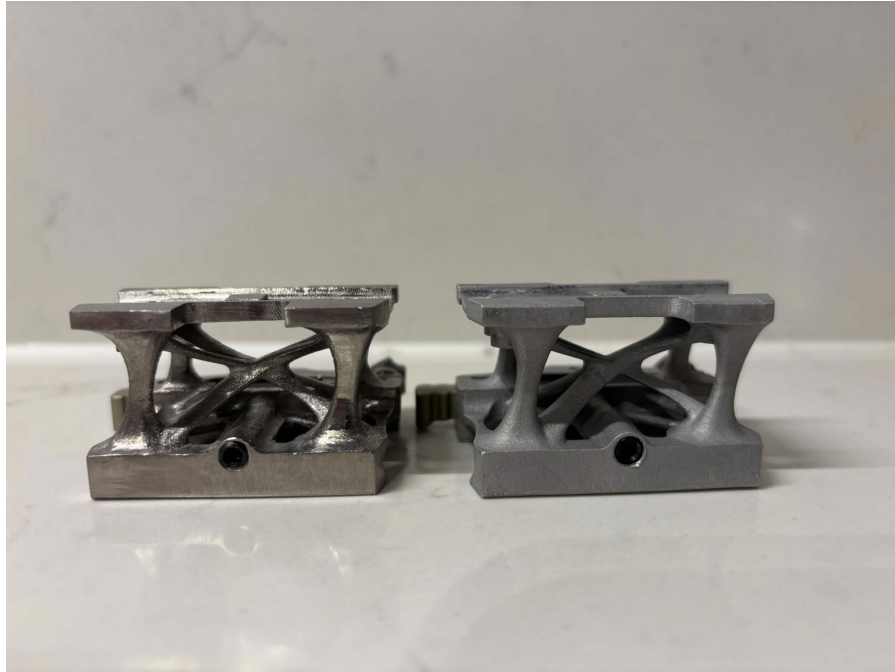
Real world assembled mounts, left is titanium and right is aluminum.
